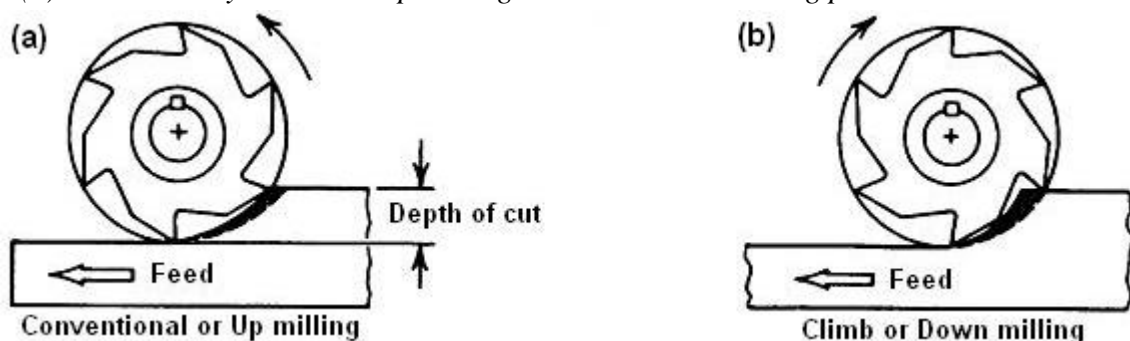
Schematic views of (a) Up milling process and (b) Down milling process
